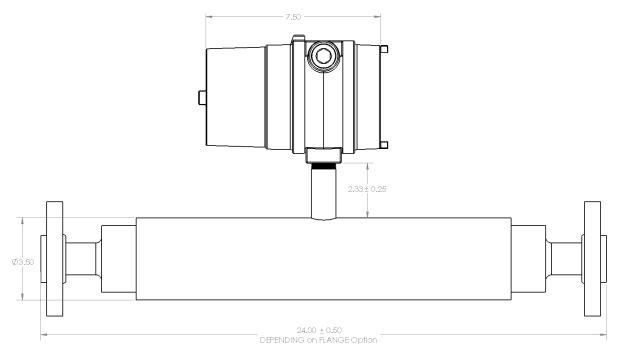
DENSITRAK SVT - SIDE VIEW - DIMENSIONS
